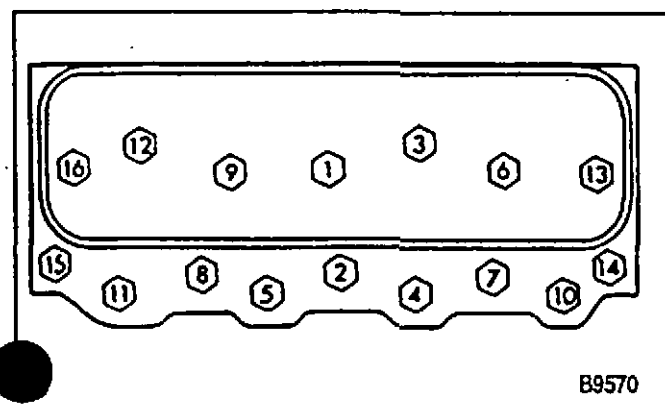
Cylinder Head Bolt Tightening Sequence (7.4L Engines)
